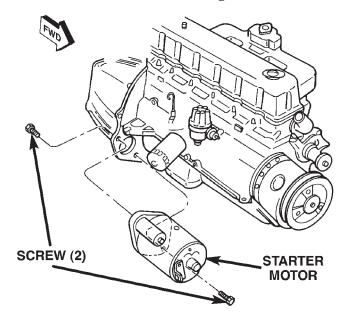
Starter Motor Remove/Install - 2.5L Engine
